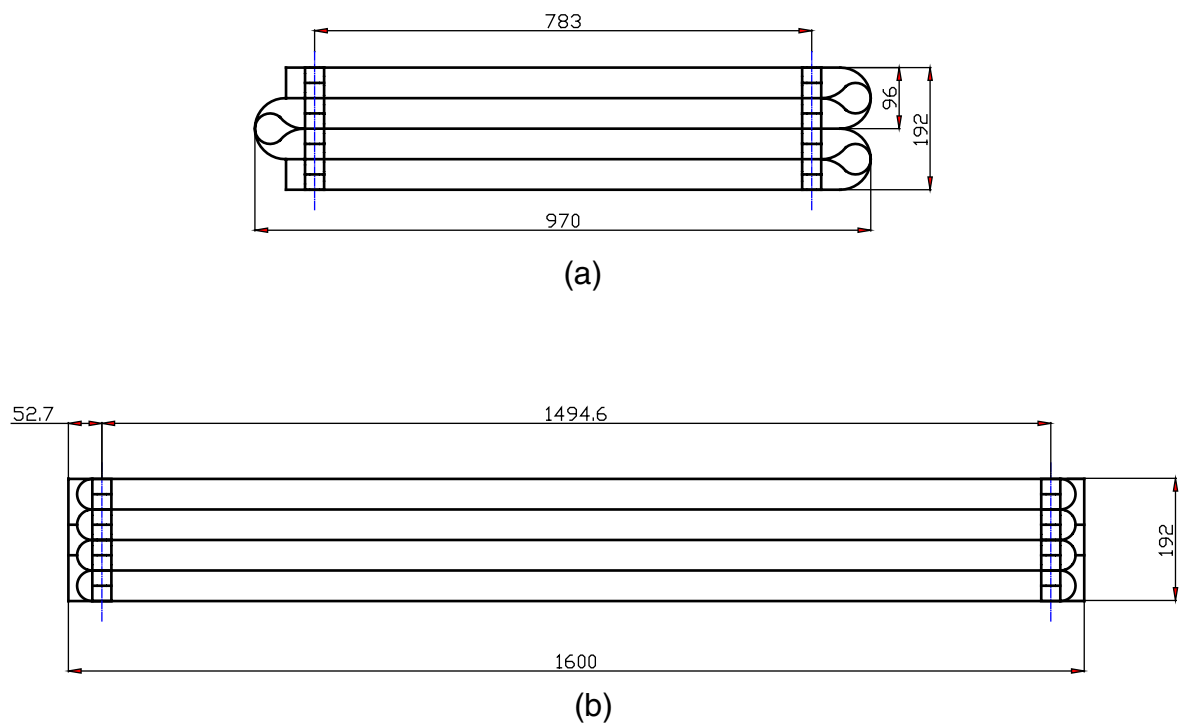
Side view and end view of half-scale reflector in packaged configuration (dimensions in mm).
